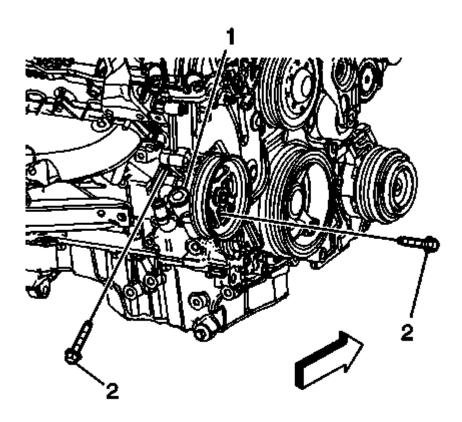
View Of Power Steering Pump & Bolts Courtesy of GENERAL MOTORS COMPANY
